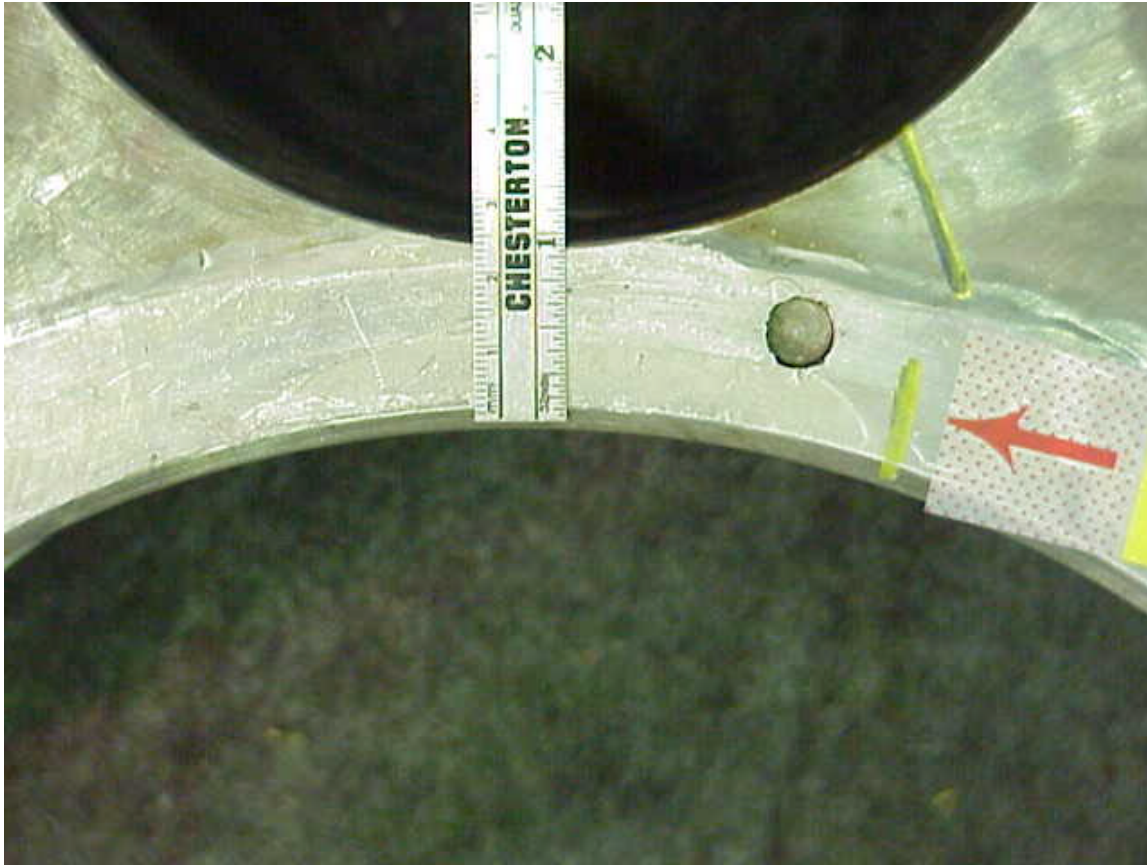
Close-up of side-view showing minimum master rod ligament and location of EDM notch (yellow line is just to show orientation and not depth)
